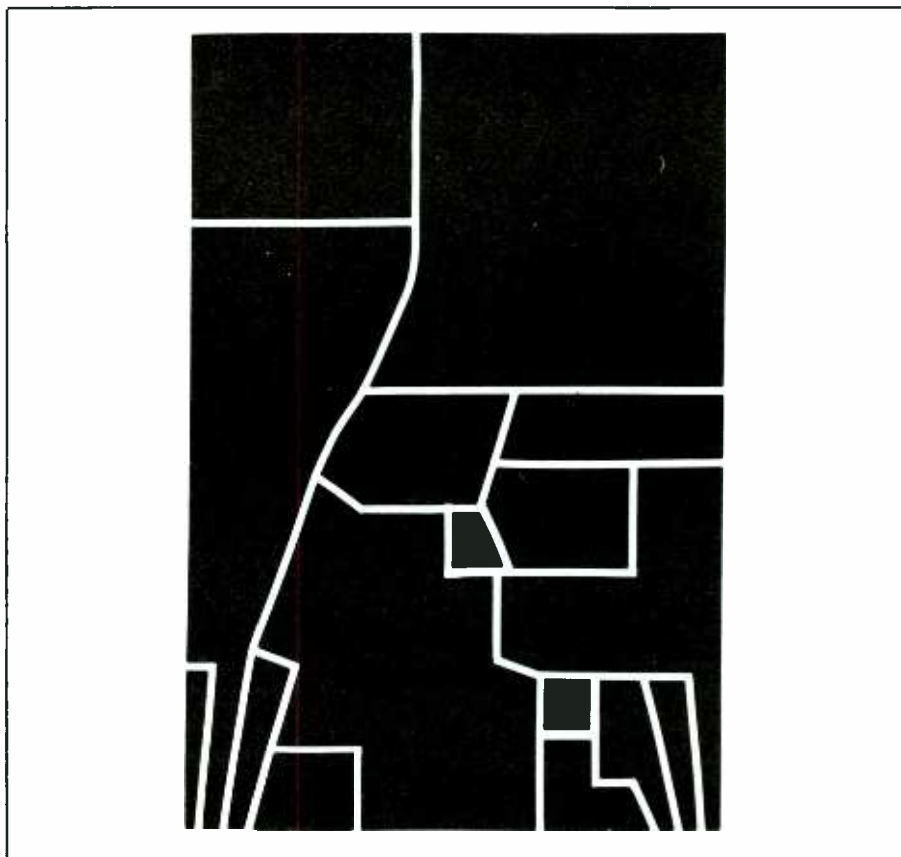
Actual-size etching-and-drilling guide for printed-circuit board.
